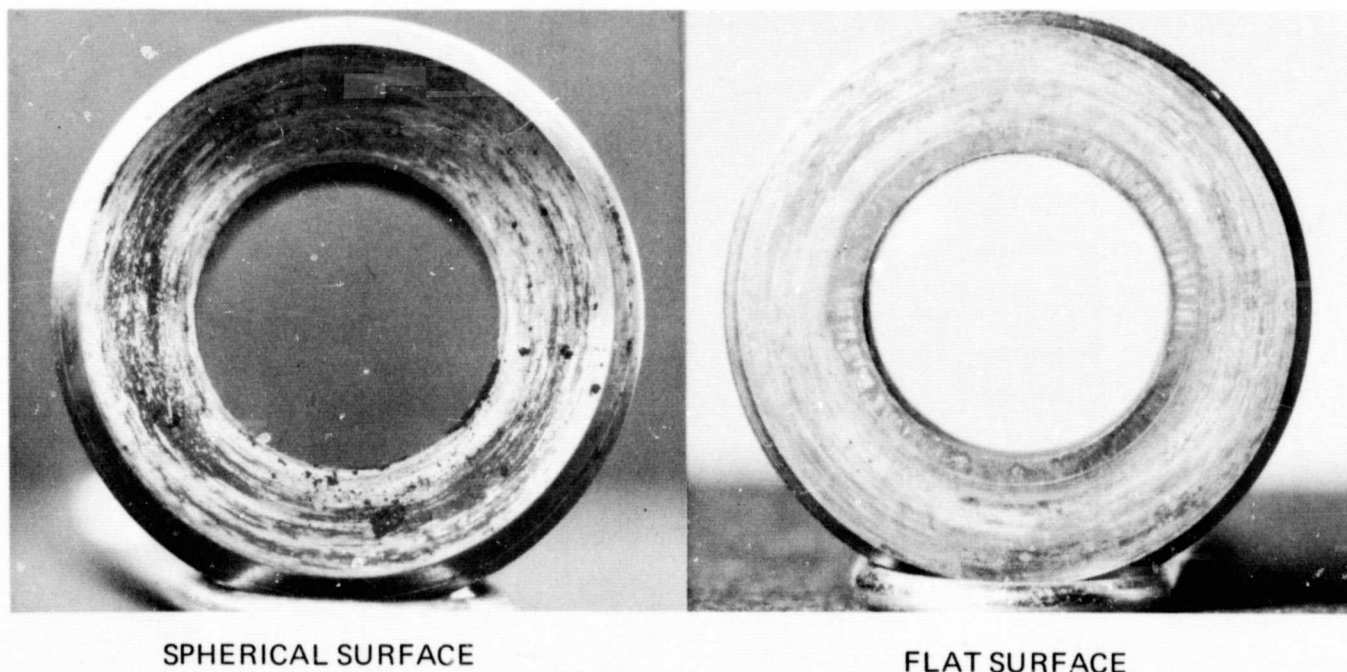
Condition of Hardface Seat Surfaces (Spherical and Flat) of Test Unit 6 After Testing (XP-93529, XP-93531)
